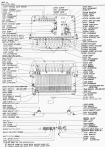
EXPLODED VIEW OF THE MOTOR ASSEMBLY.
